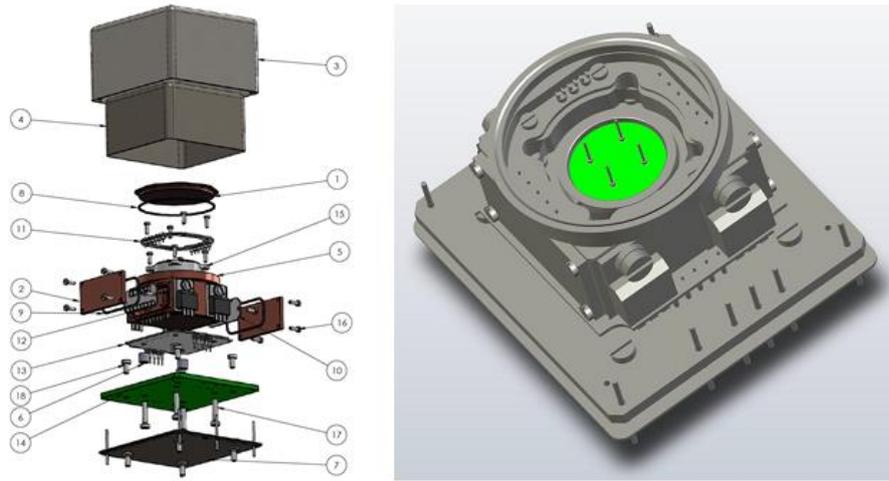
Exploded view of the test oscillator (left) and mounted oscillator (right)
